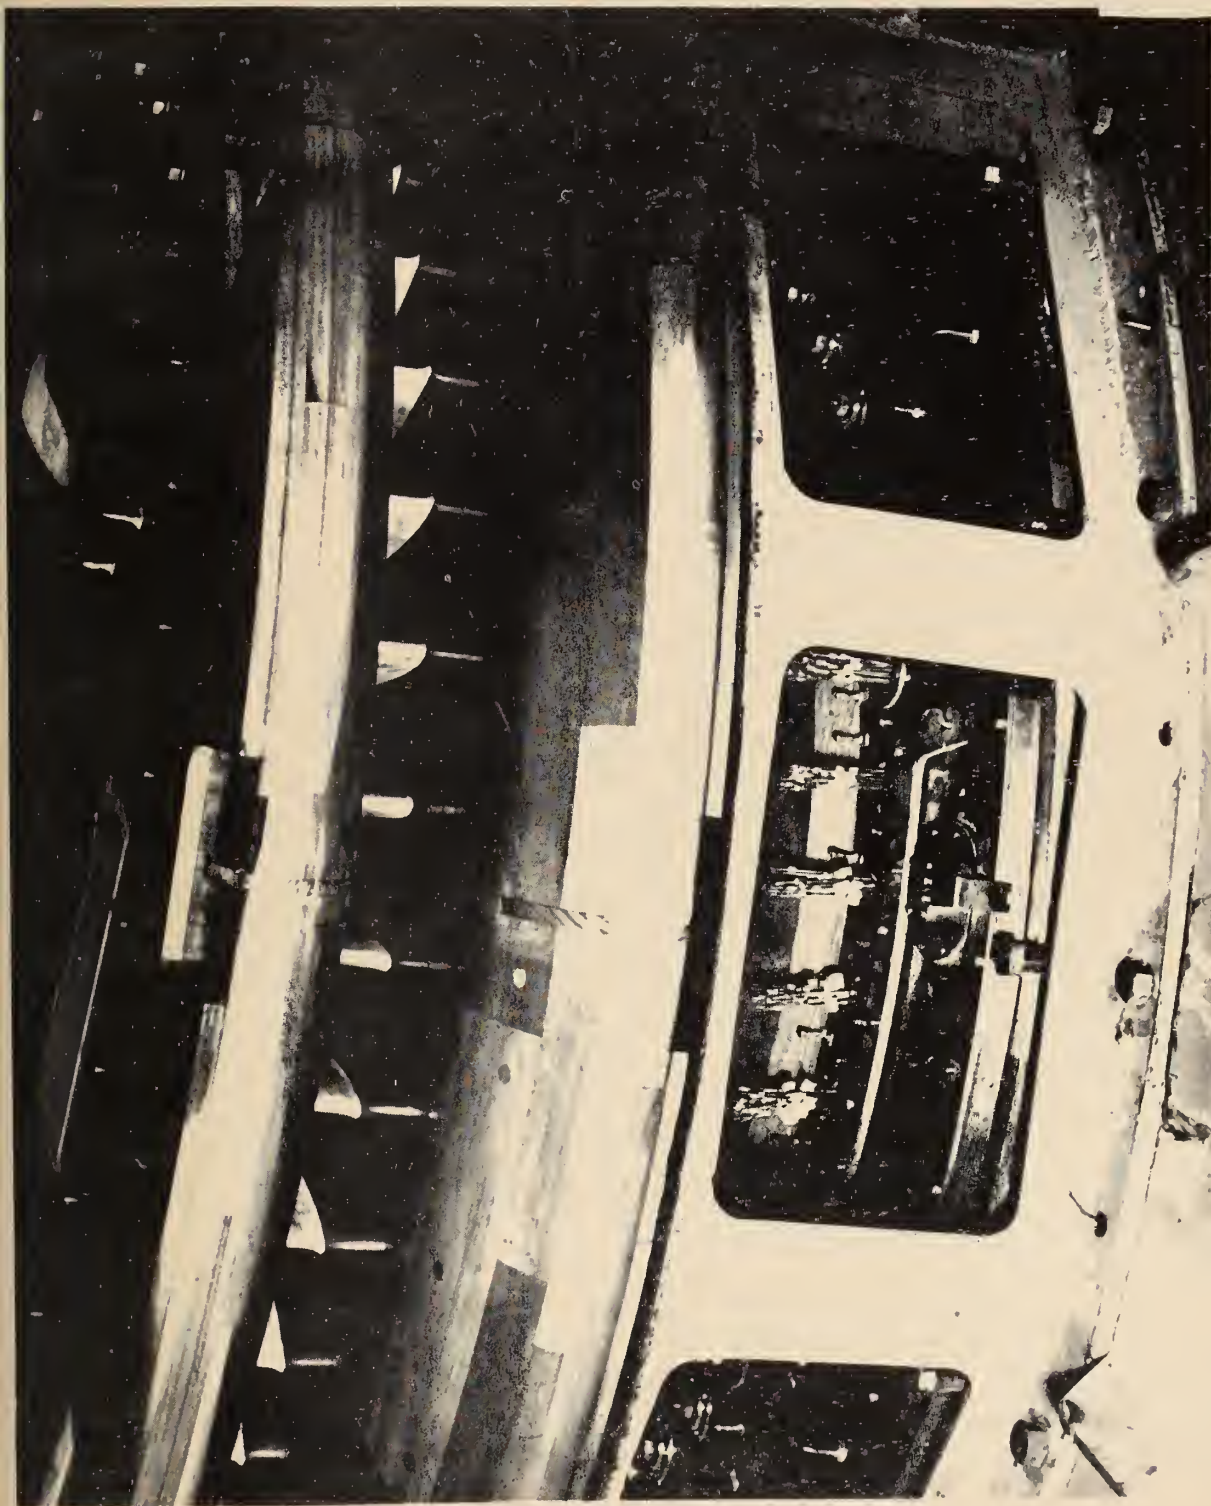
SIDE VIEW SHOWING INLET GUIDE VANES AND
